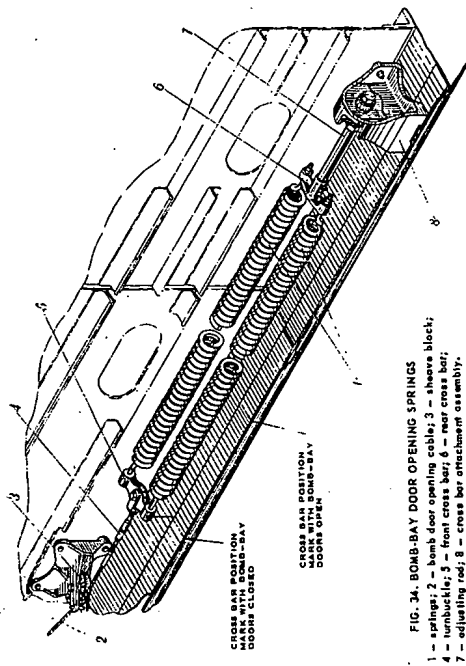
BOMB-BAY DOOR OPENING SPRINGS
